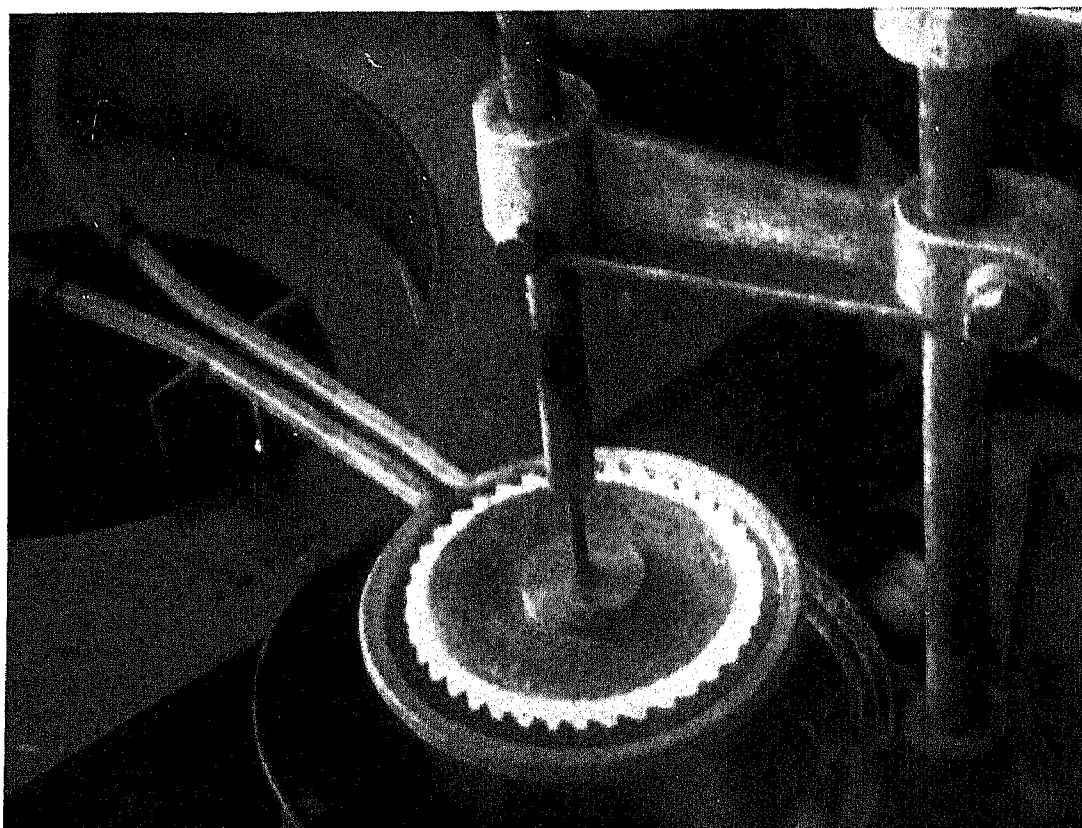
Heating a 160-mm. cutter in the field of a cylindrical coil. Frequency, 10^6 cycles per sec.
